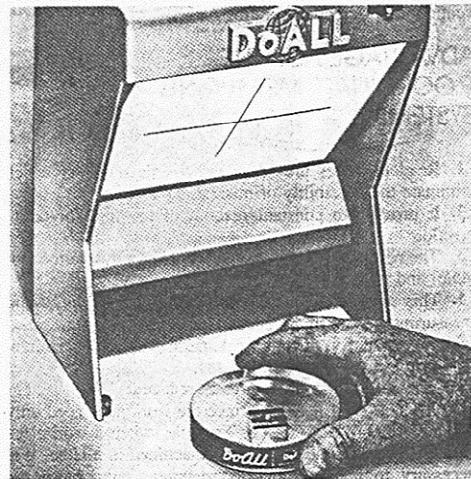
Checking gage block using an optical flat and a helium light source.
